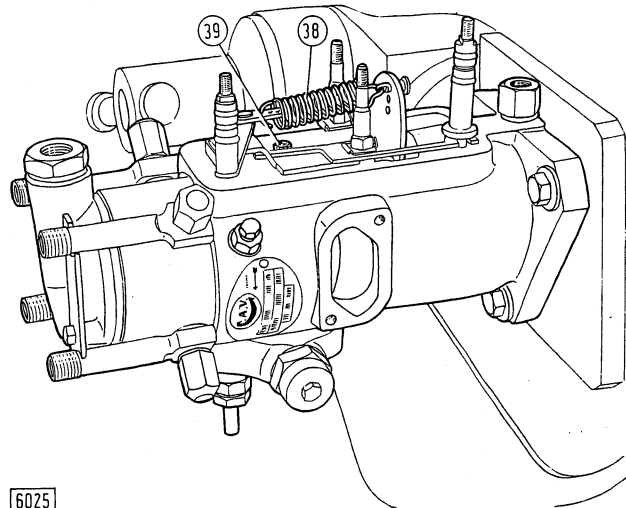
Speed governor without cover. 38. Control spring. - 39. Screw securing plate to pump body.
